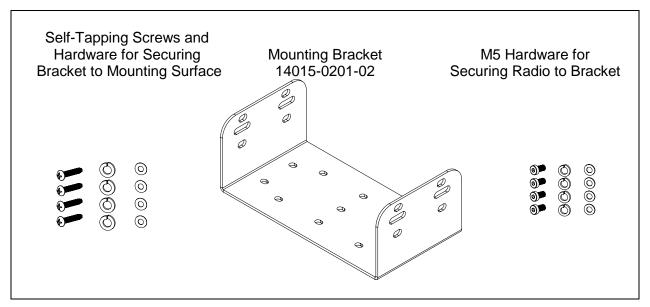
Mounting Bracket Kit 14015-0201-01
